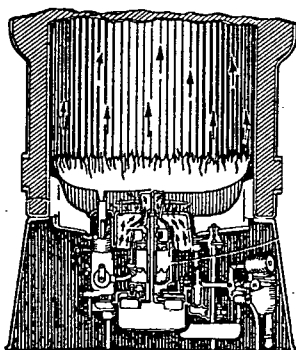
CENTER FLAME VERTICAL ROTARY BURNER
